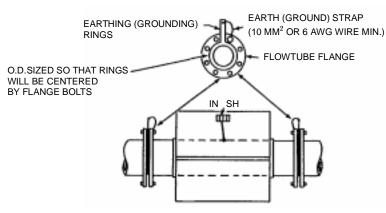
Use of Earthing (Grounding) Rings with Flanged End Flowtubes
